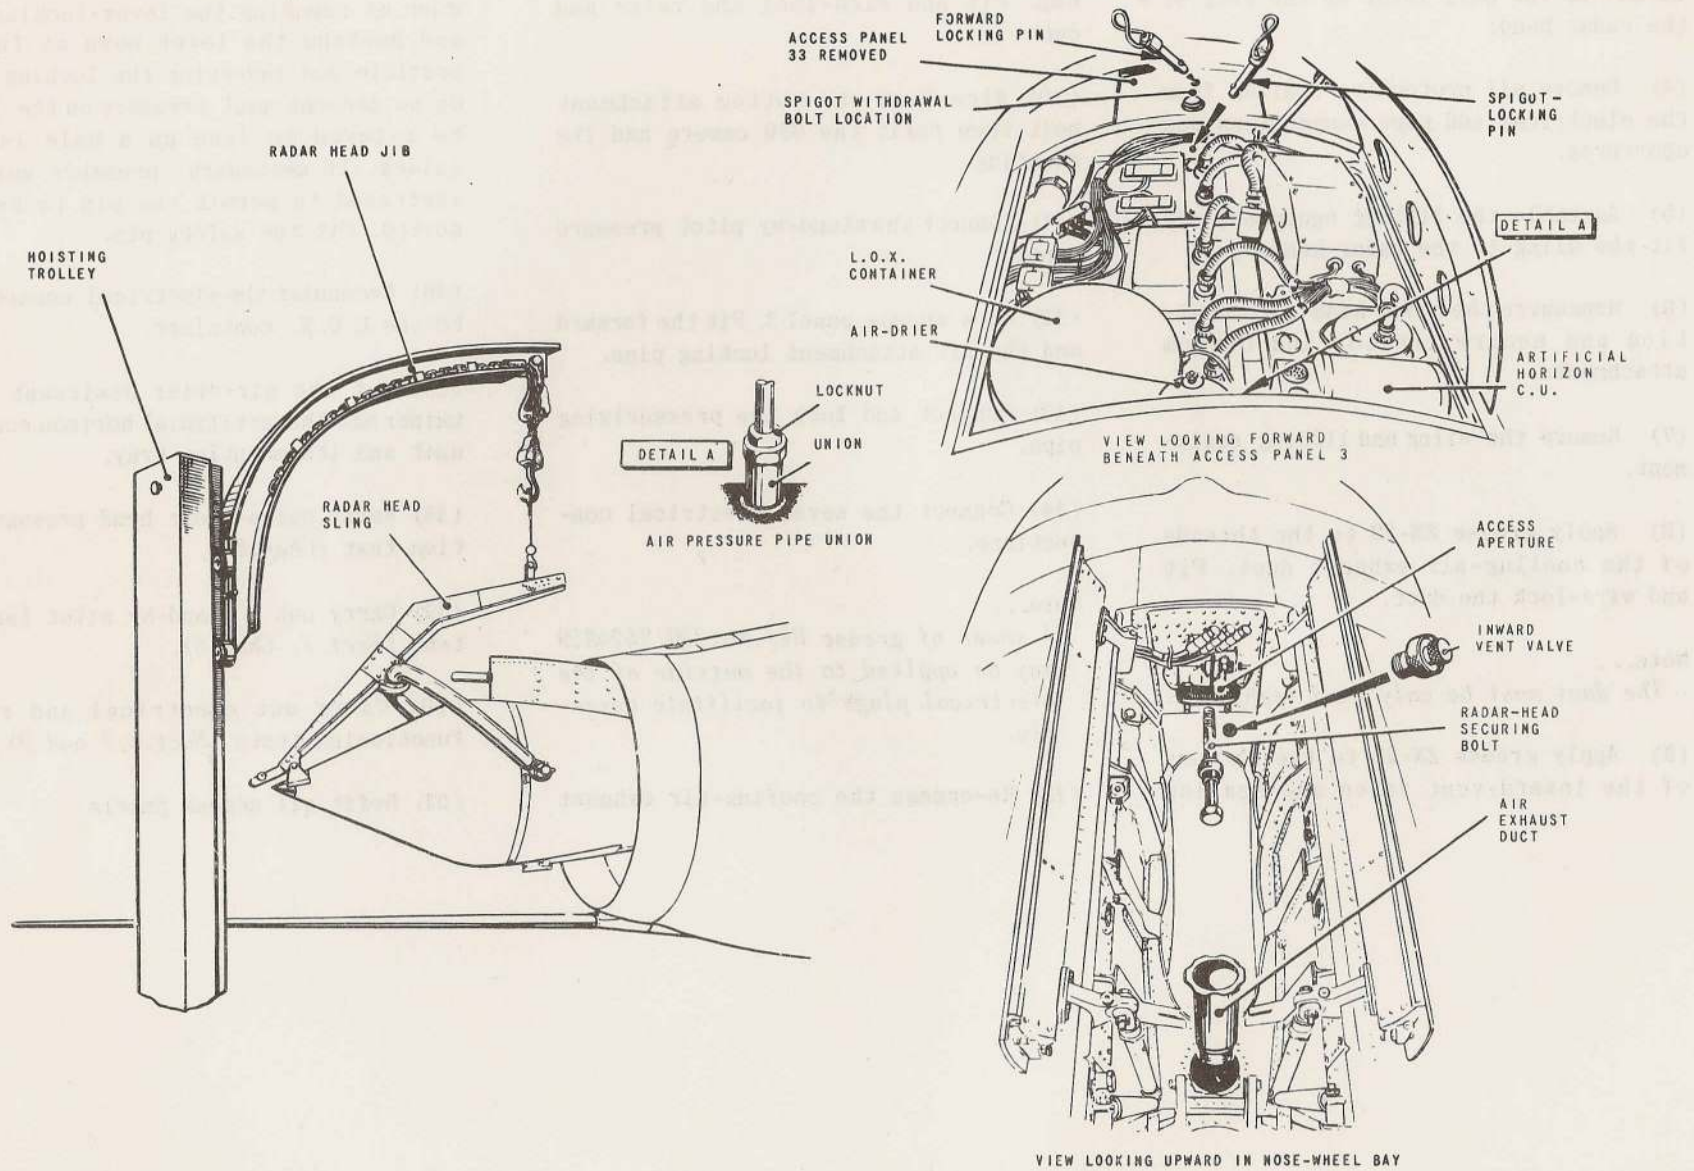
RADAR HEAD - REMOVAL AND ASSEMBLY
